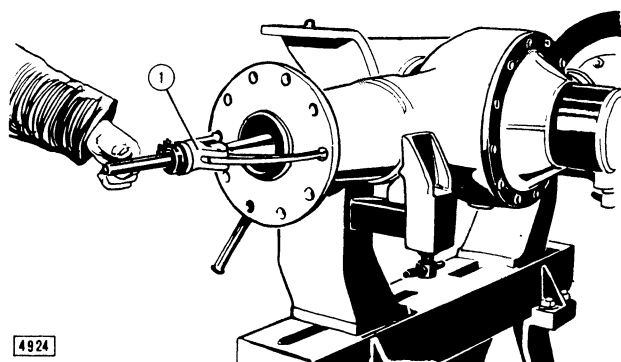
Removal of axle shaft bushing from axle housing
